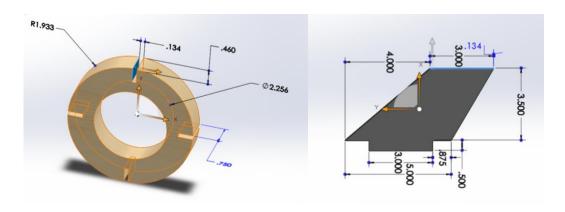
Top Part of Nosecone (ABS); Bottom Part of Nosecone (PLA); dimensions in inches
